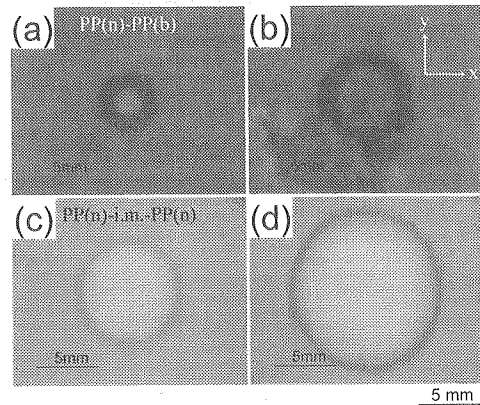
Surface appearances of joint parts produced under respective joining conditions.
